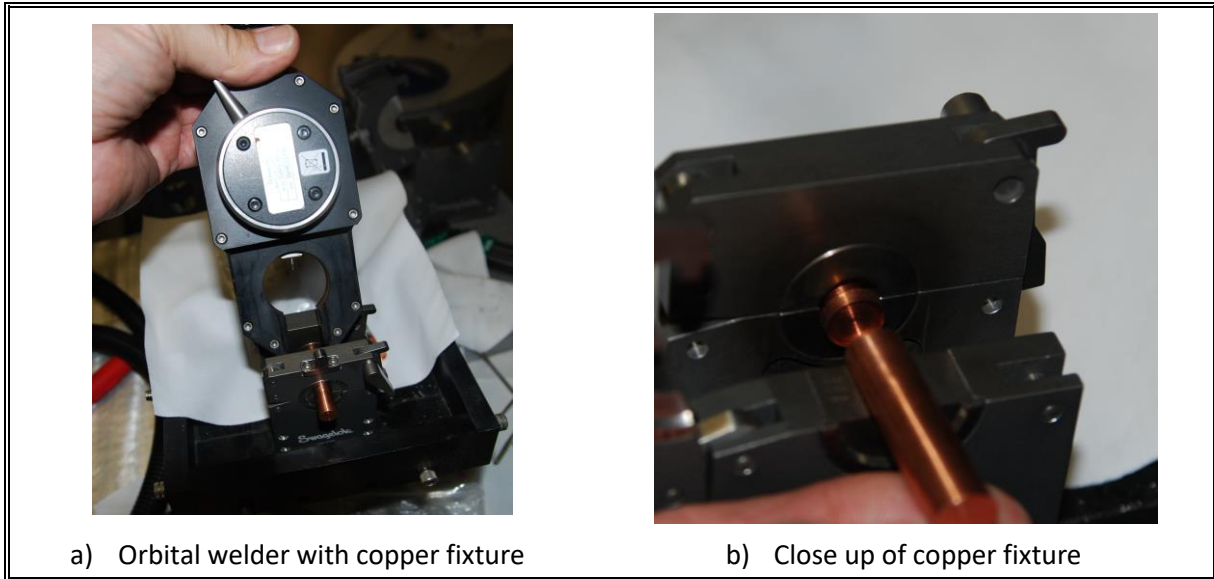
(a) Orbital welder; (b) Close up of copper fixture
